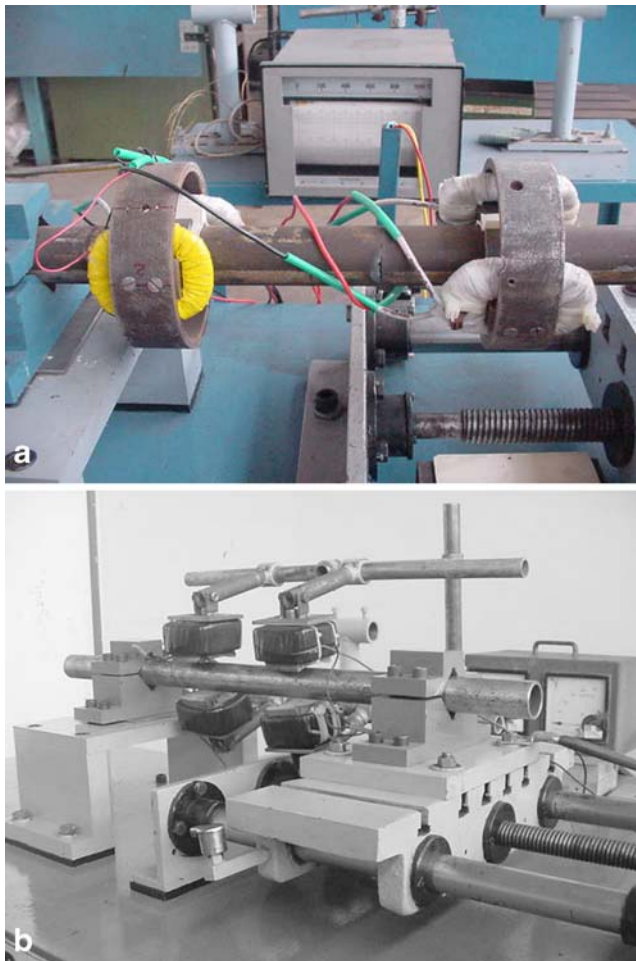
Magnetically impelled arc butt welding—phase 5
